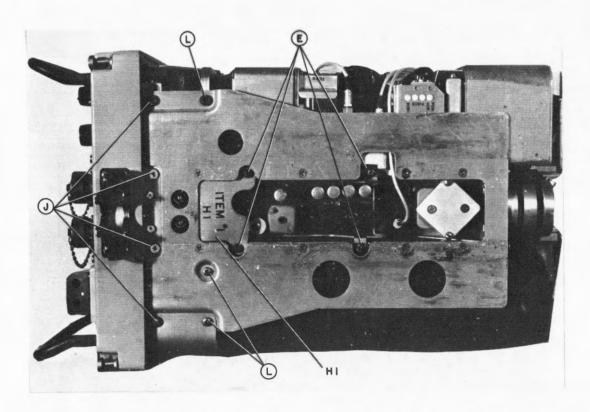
Receiver Transmitter RT-581()/URC-9, Bottom View, Subassembly Removal
